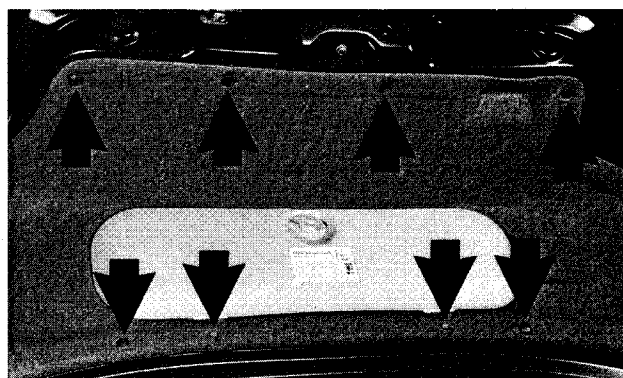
Trunk lid trim and tool kit retaining screws and clips (arrows).
